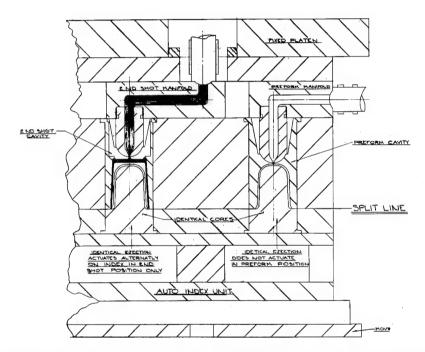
Schematic Layout for Multi Colour Moulding using Auto Index Technique
